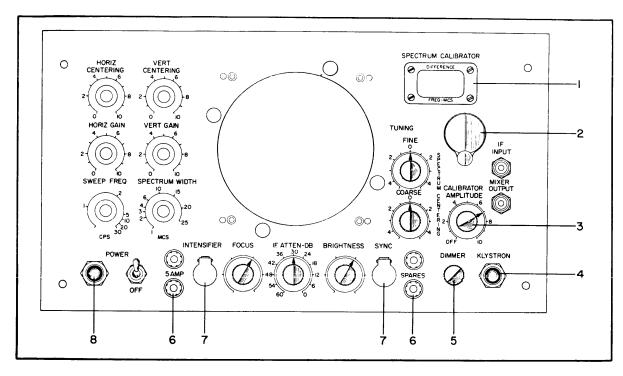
Upper Panel Assembly, Front View (Sheet 1 of 2 Sheets), Index Nos. 1 through 8
